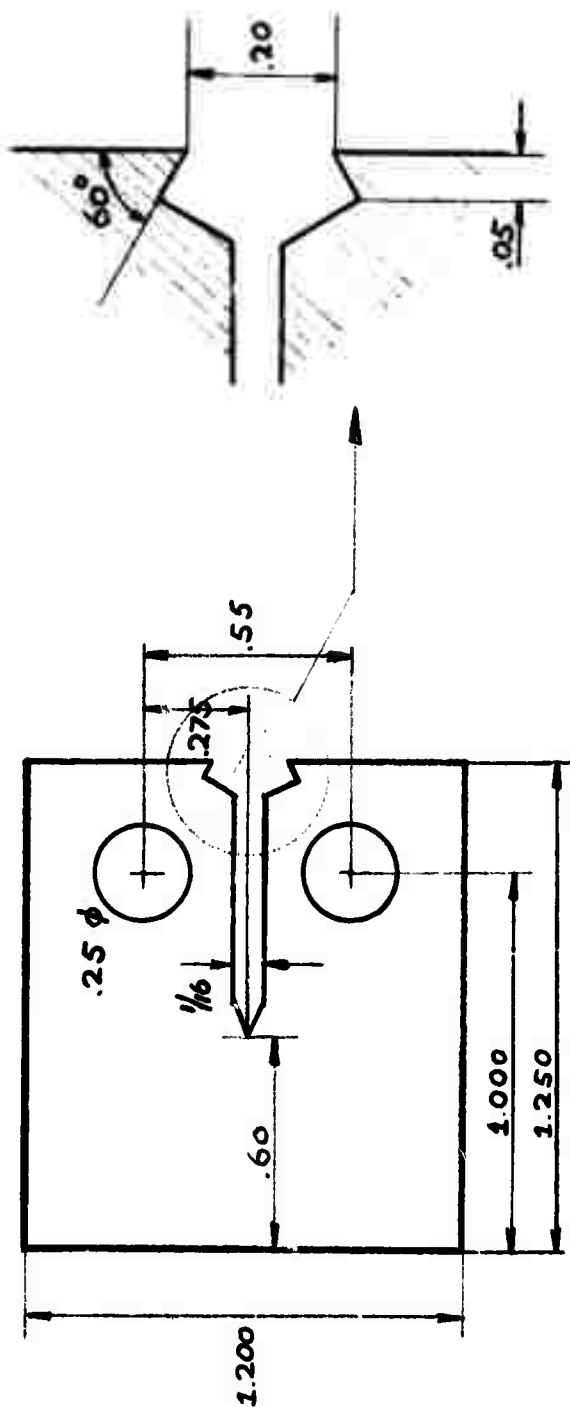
Compact tensile fracture toughness specimen. The dimensions are for a 0.25 inch thick specimen.
